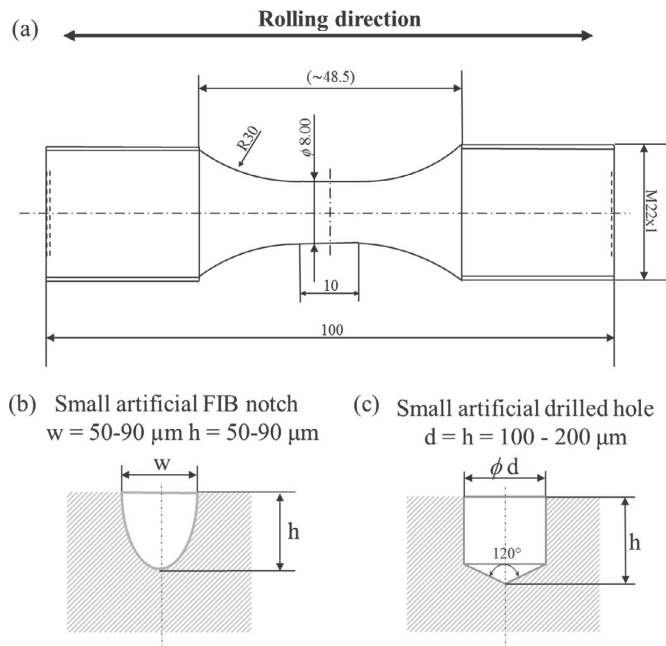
(a) Dimensions of the test bar in mm, (b) FIB notch dimensions in μm , and (c) dimensions of the drilled hole in μm .
